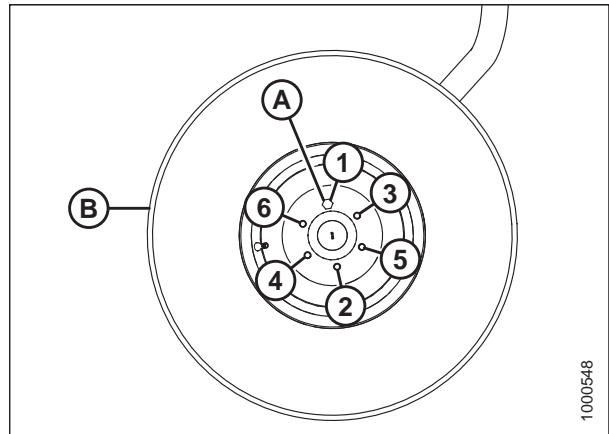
Formed Caster Wheel Bolt Tightening Sequence
